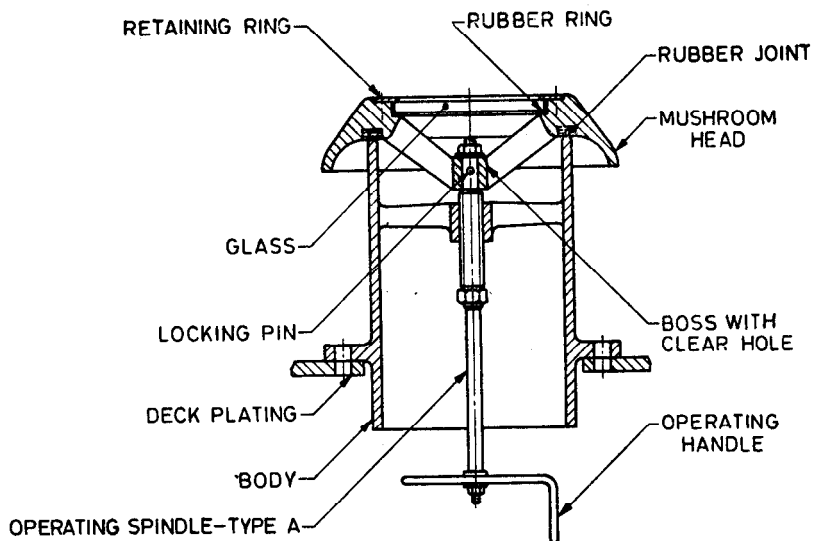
ASSEMBLY OF CAST IRON TYPE MUSHROOM VENTILATOR WITH GLASS TOP
